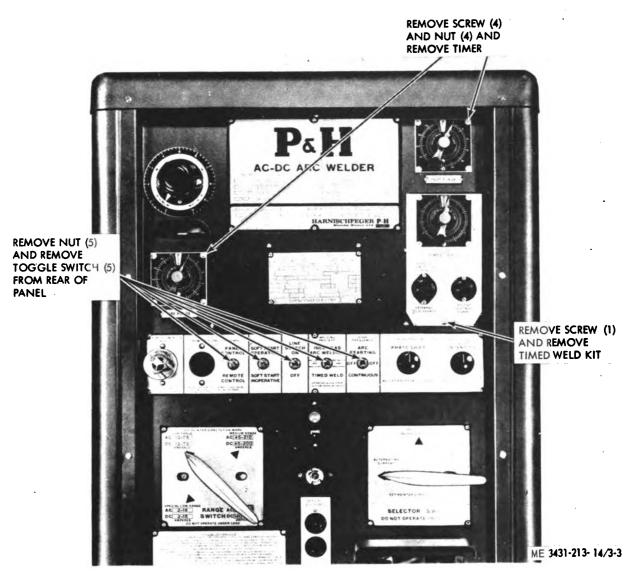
Upper control panel components, removal and installation, Model 2100H2007.
